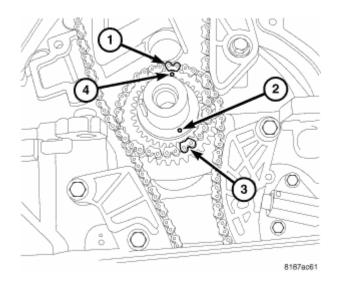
Crankshaft Timing Marks Courtesy of CHRYSLER LLC
